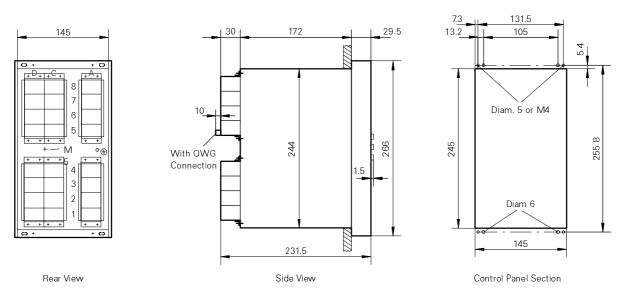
Dimensional Drawing of 7XP2030-2 for Panel Flush Mounting or for Cubicle Installation, Device Version 7SA518 (all dimensions in mm)
